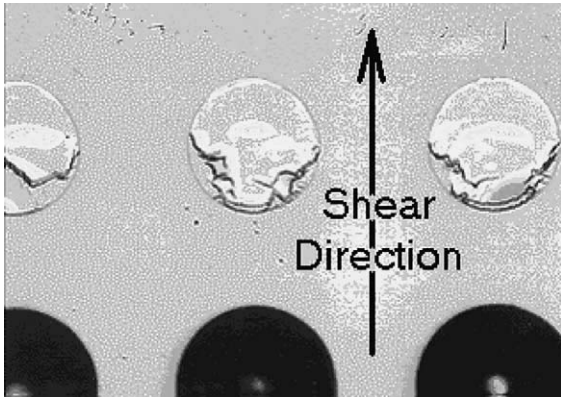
Shear fracture surface as fabricated with one of the polymer materials tested. Solder bump removed from polymer together with UBM metal.
